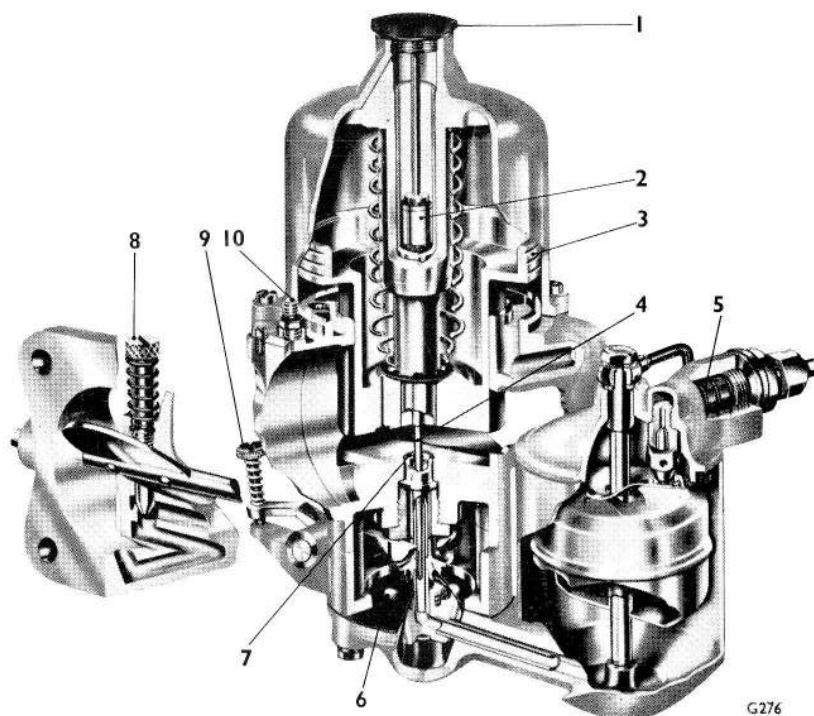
CUT-AWAY VIEW OF ONE CARBURETTER
